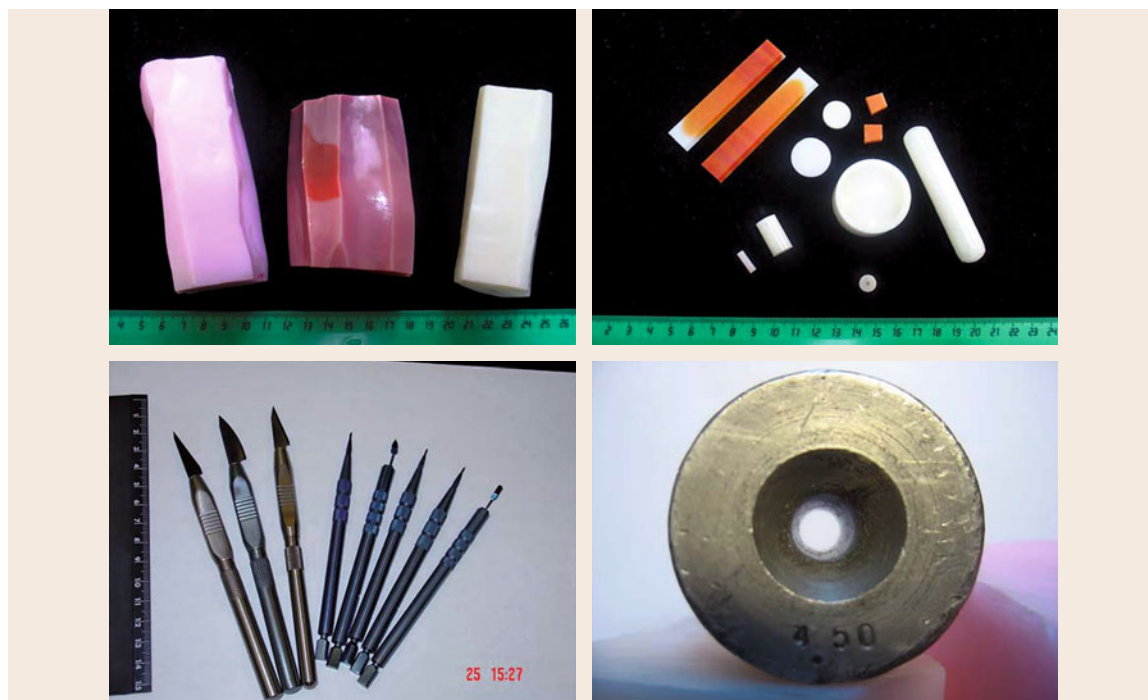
Technical articles and components fabricated from PSZ crystals. PSZ crystals (top left); cutting elements, rolls and grinding tool fabricated from PSZ (top right); medicine scalpels with cutting edge from PSZ (bottom left); wire drawing die with insert from PSZ (bottom right)
